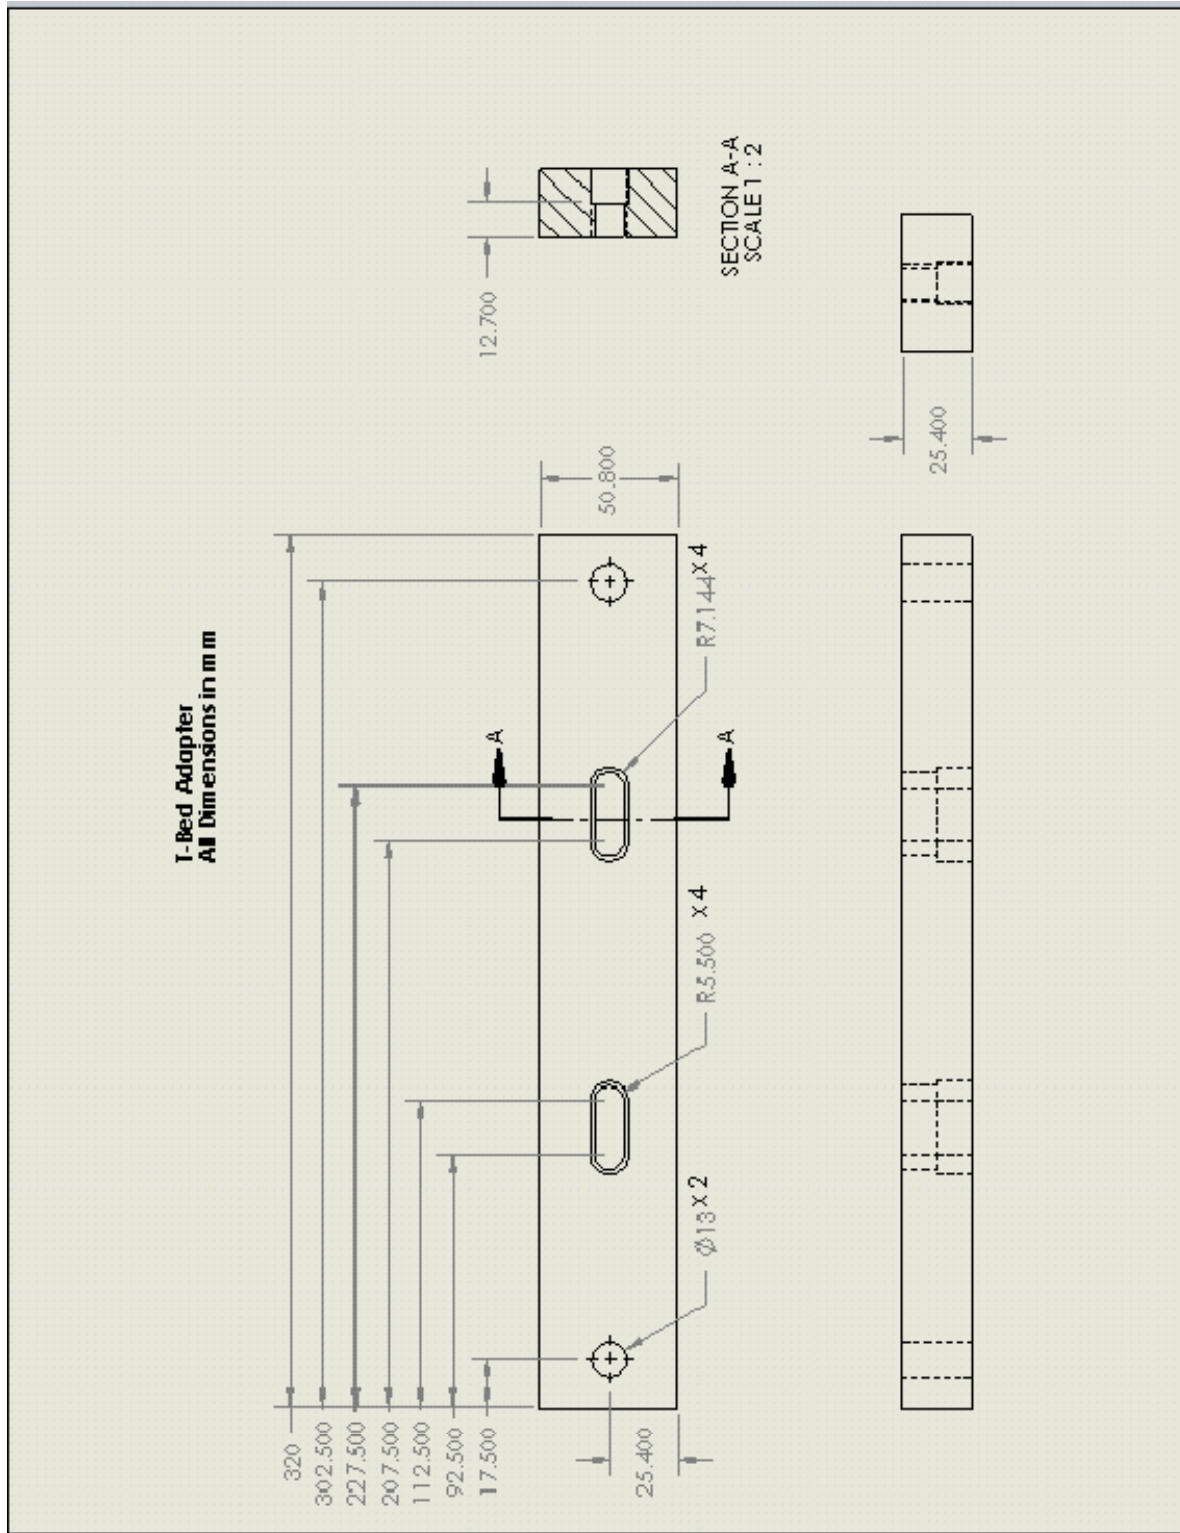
Engineering Drawing of Sensor Mounts Adapter Plate
